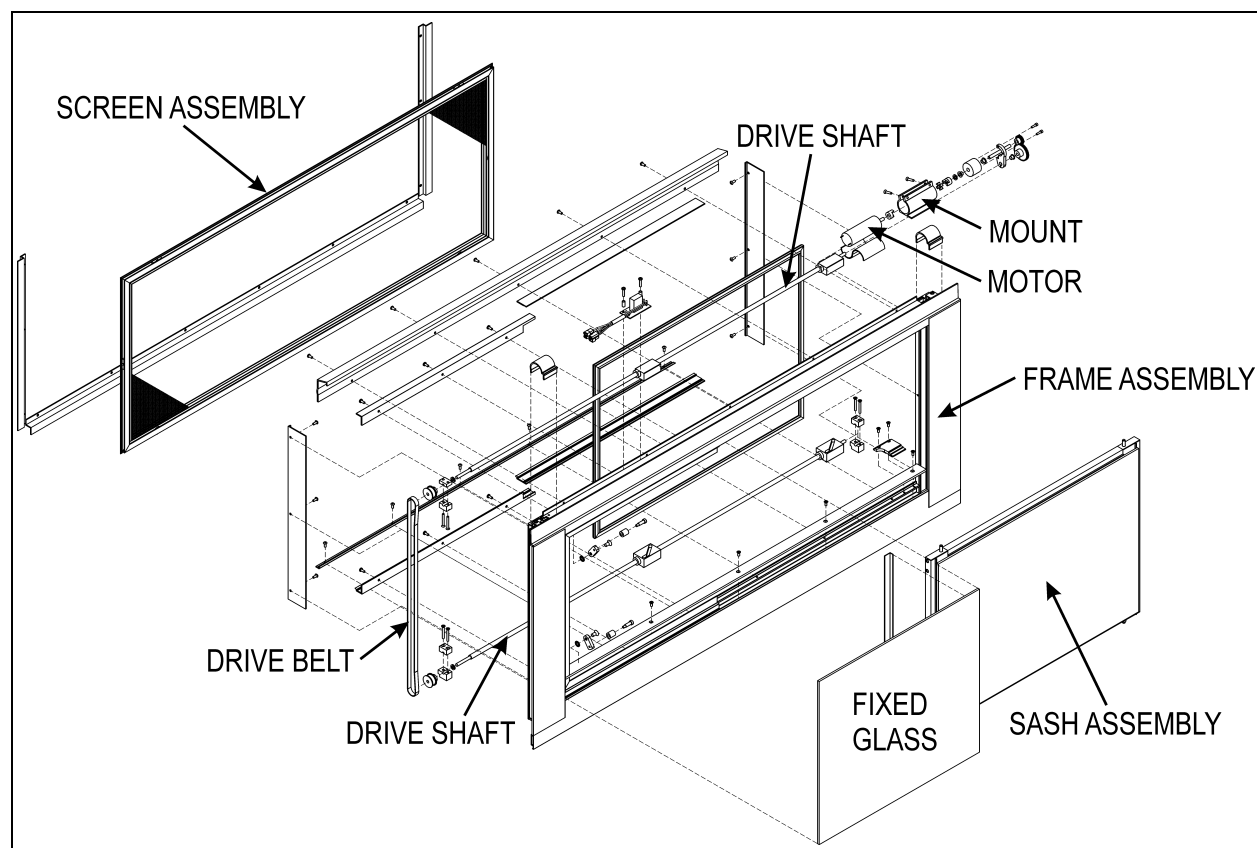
ELECTRIC SLIDING WINDOW EXPLODED VIEW
